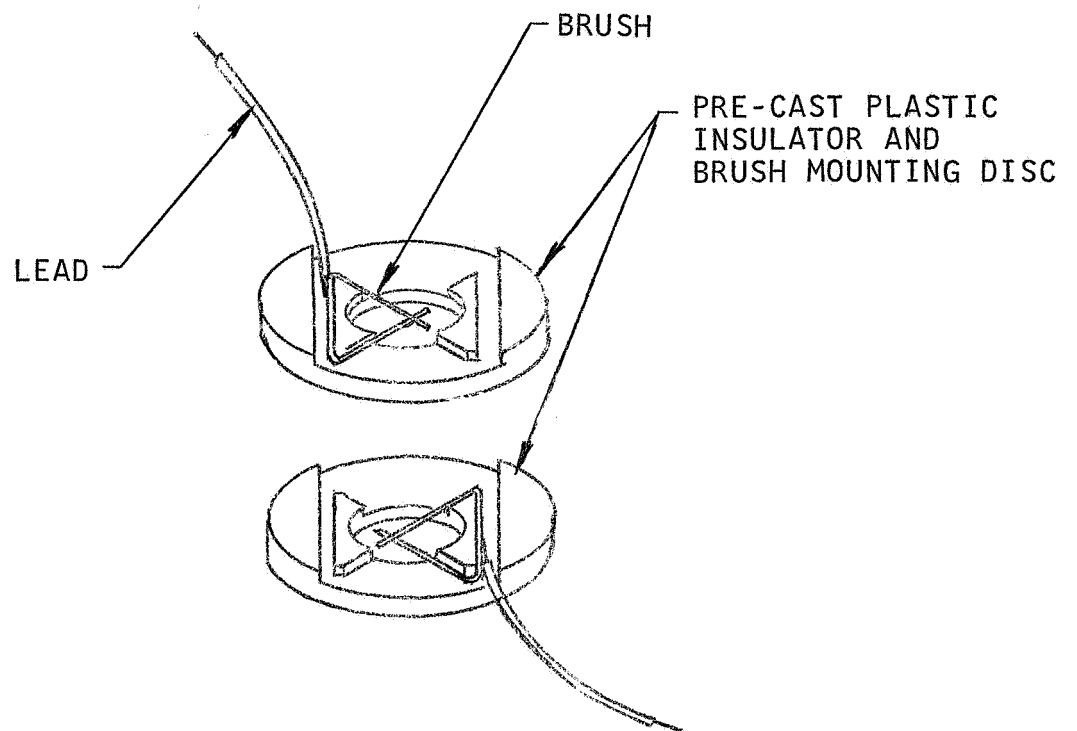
STACKED TYPE BRUSH ASSEMBLY
